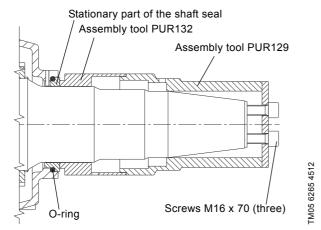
Fitting the stationary part of the secondary shaft seal, range 78
